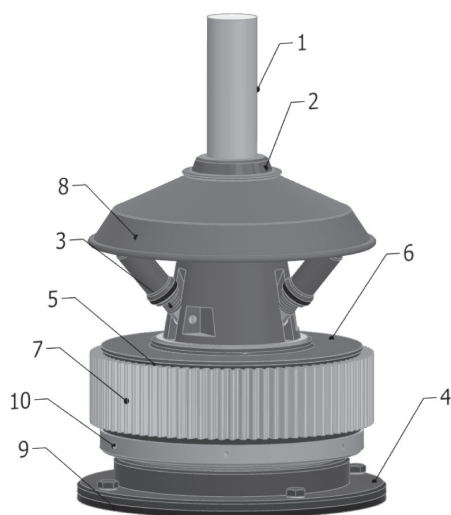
General construction of a hybrid wind turbine shaft bearing node with automatic load switching, wherein: 1 – shaft, 2 – support sleeve, 3 – control lever, 4 – bearing base, 5 – sheet metal cover (lubricant tank), 6 – cover, 7 – harmonic ribbing system, 8 – control lever cover, 9 – damping lining, 10 – adjustment holes
